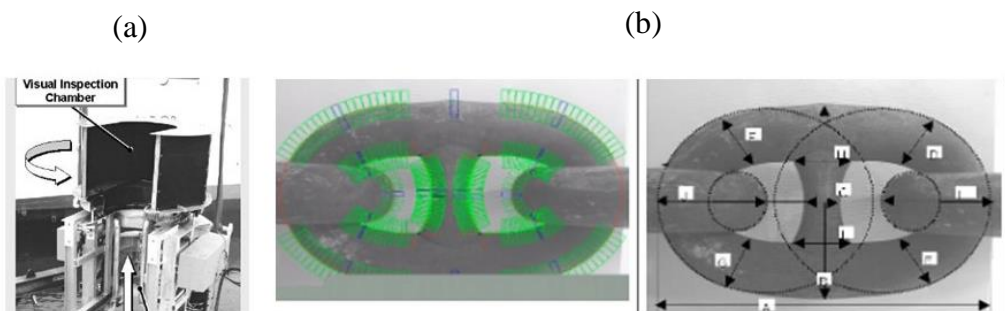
ICARE anchor chain inspection mechanism; (a) visual inspection chamber; (b) image-processing sample [22]
